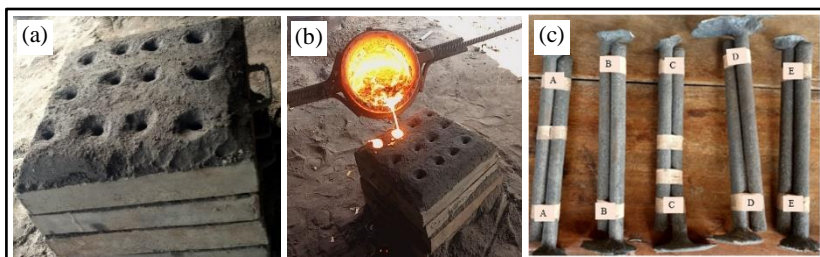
Green sand mold for cast iron specimen castings (a), pouring of molten metal into the mold (b) and cast rods for the mechanical test (c)
